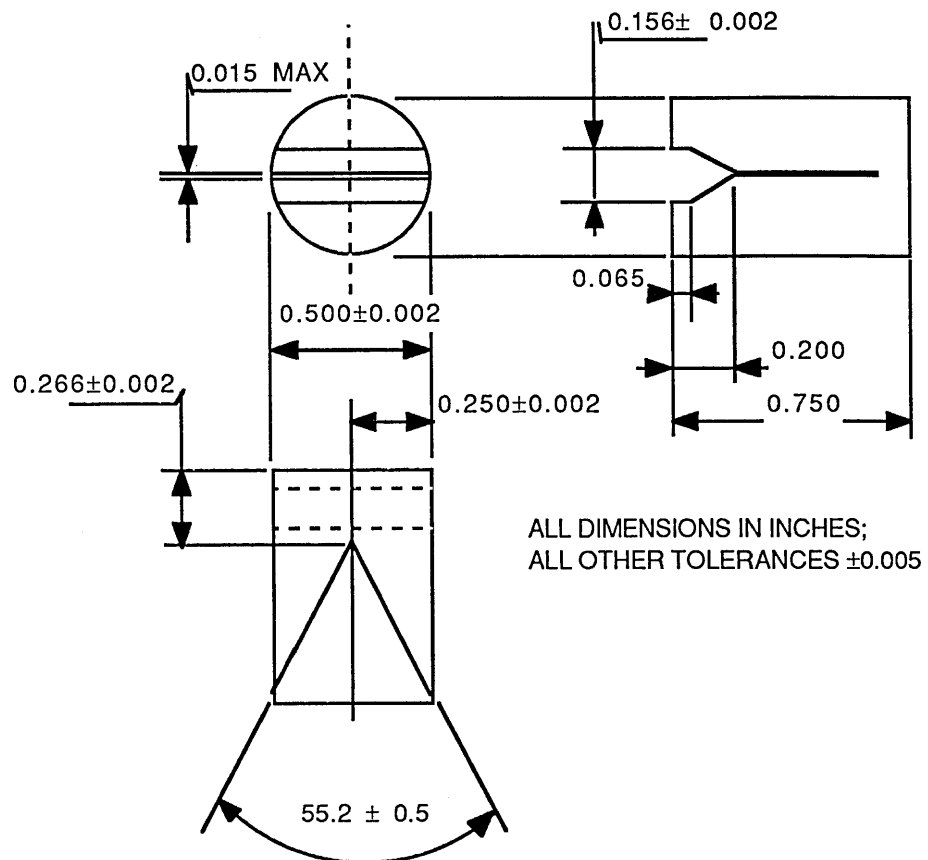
"Terratek" short rod fracture toughness test specimen
